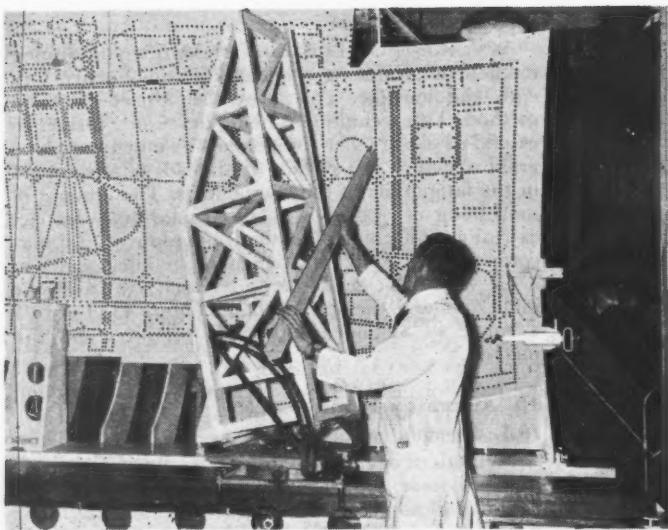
Use of the Fairey three-dimensional lofting equipment for marking out jig skins
